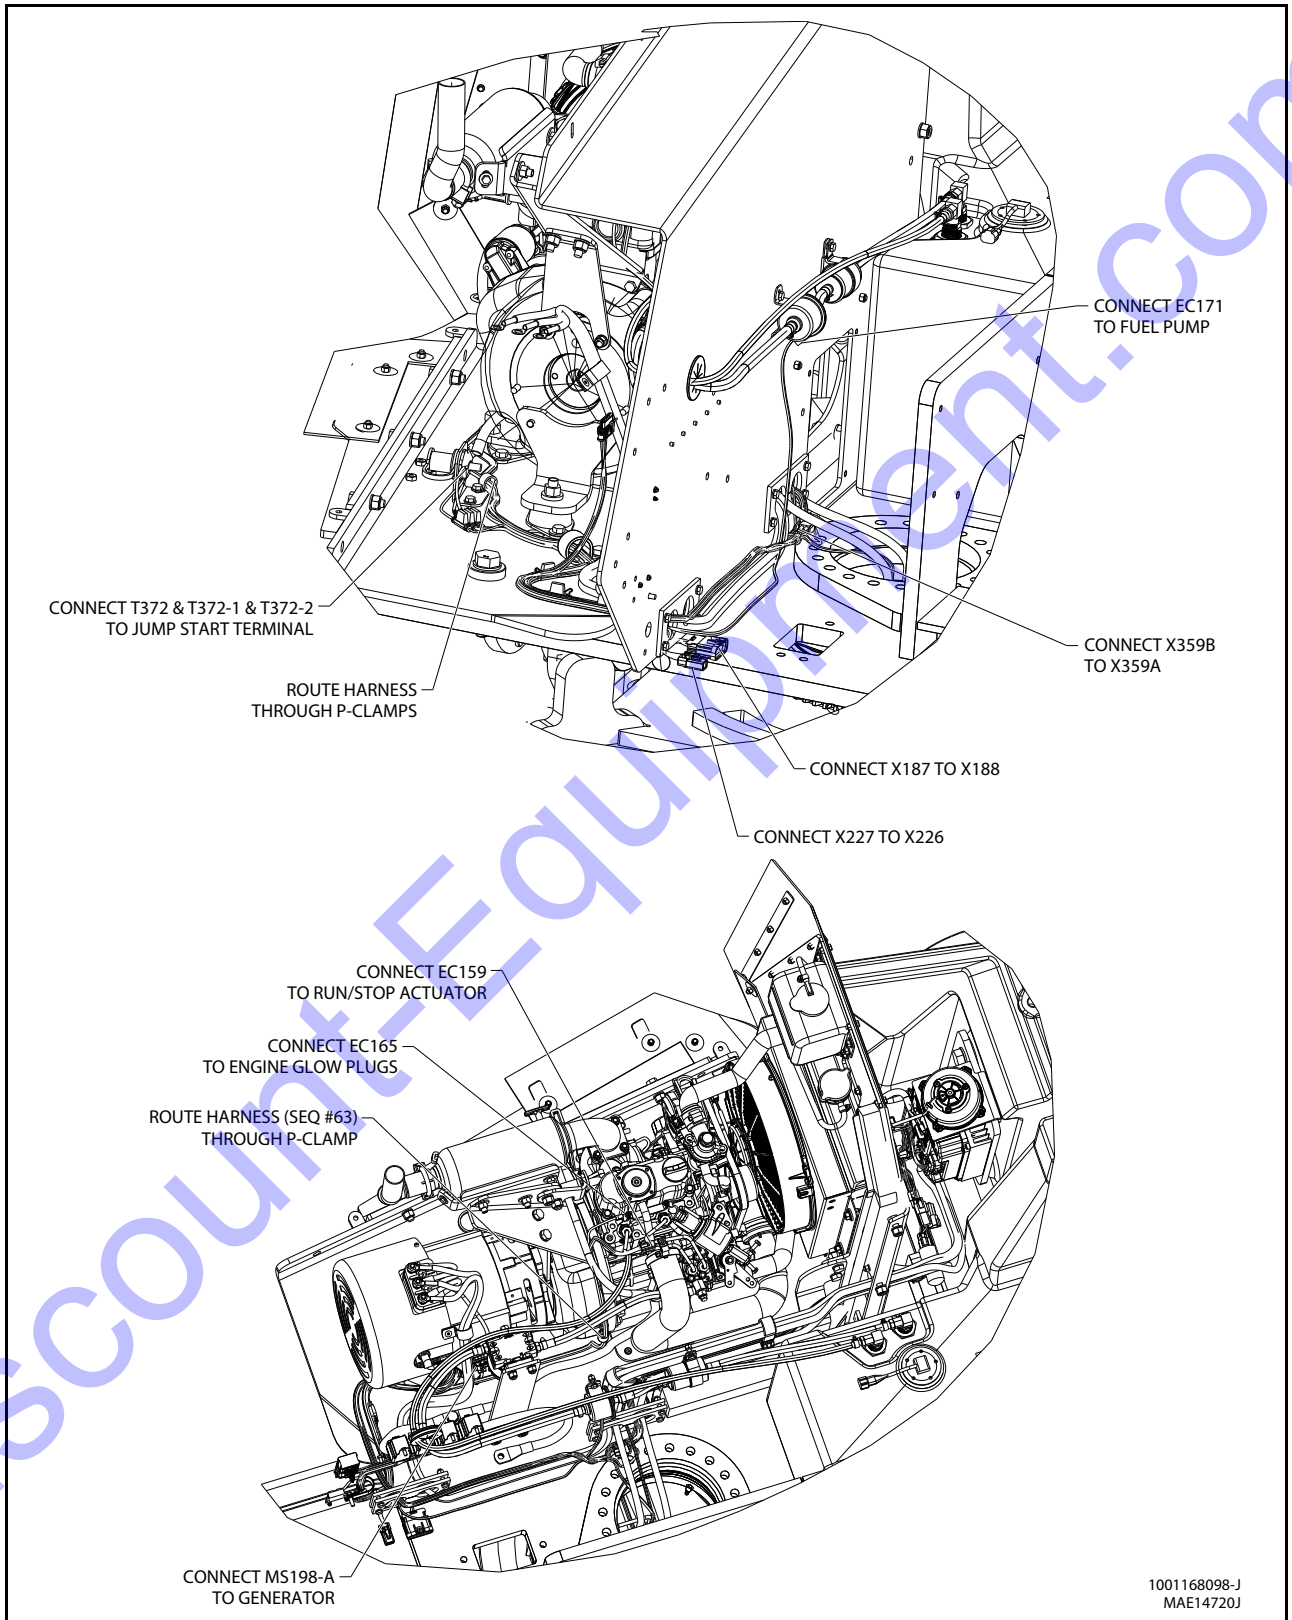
Engine and Generator Electrical Components - Sheet 1 of 4
